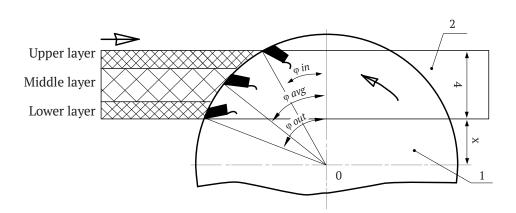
Particle board cutting scheme: 1 - saw; 2 - board
